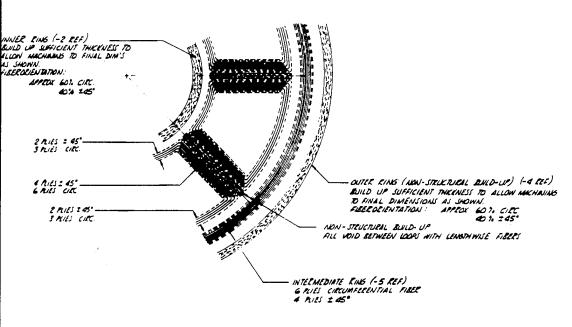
Base Disc Assembly - Helicopter Transmission Housing (WRD Drawing No. 4692).
